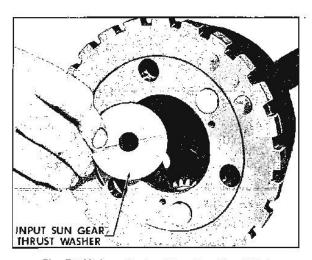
B-88 Removing Input Sun Gear Thrust Washer
